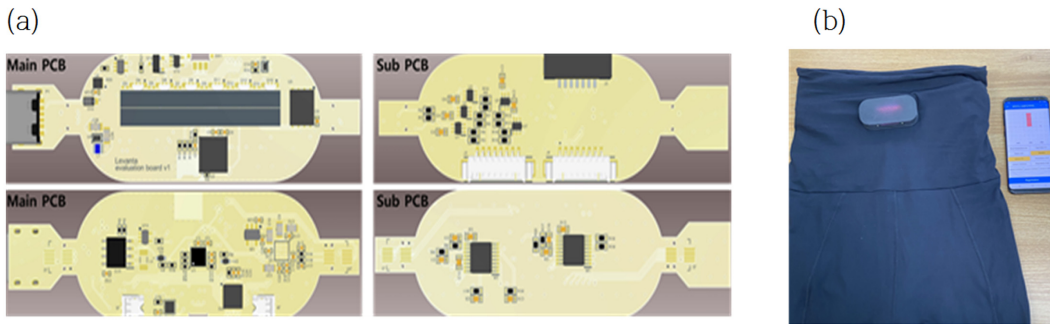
(a) PCB image, (b) Attached to PCB leggings.
